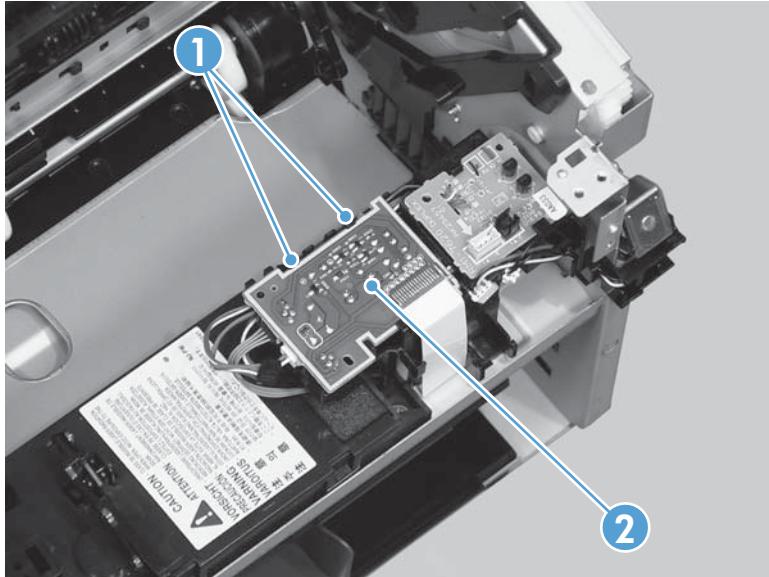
Remove the duplex-connector PCA (3 of 5)
